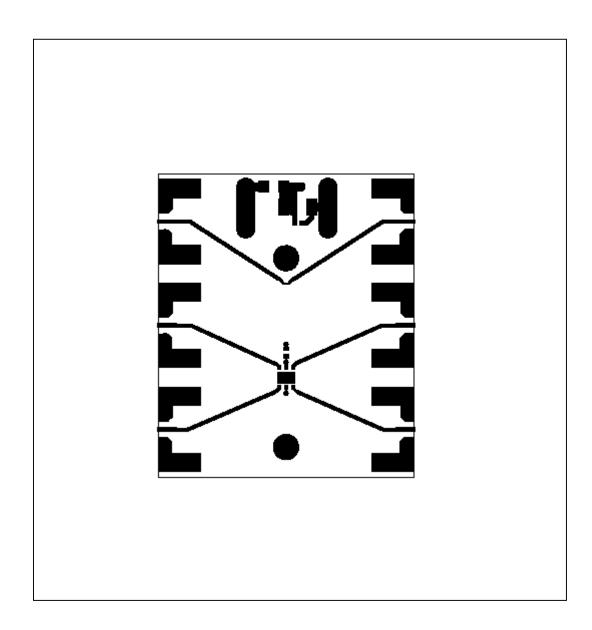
MAX3785UTTA EV Kit PC Board Layout – Component Side (2X), layer 1.
